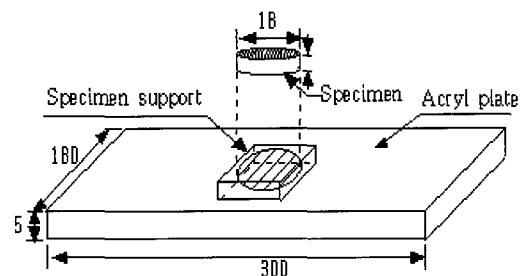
Shape and dimension of specimen for cavitation erosion test(unit:mm)
